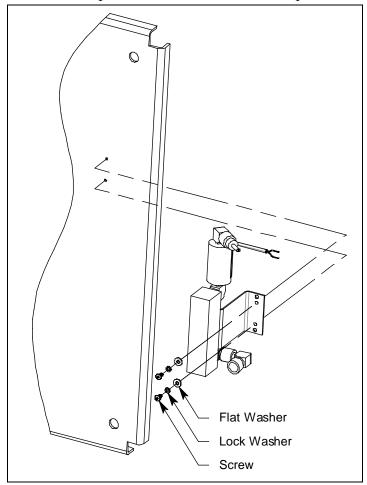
Attaching the Sensors Flow Flowmeter Bracket to Plate
